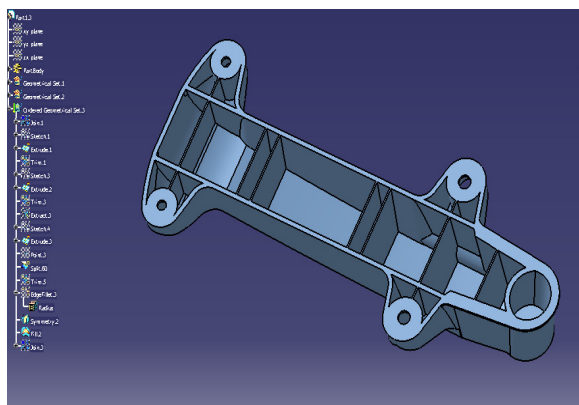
Isometric view and Rear view Geometric model of the mounting bracket
